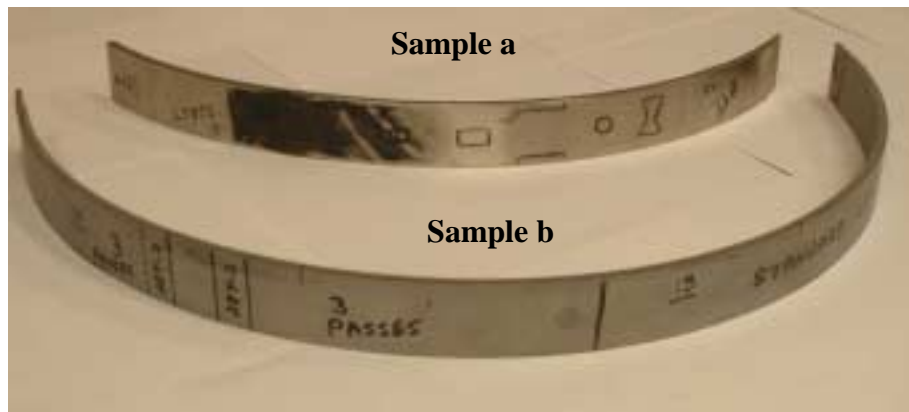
Pratt and Whitney turbine blade casing pieces with defects.
